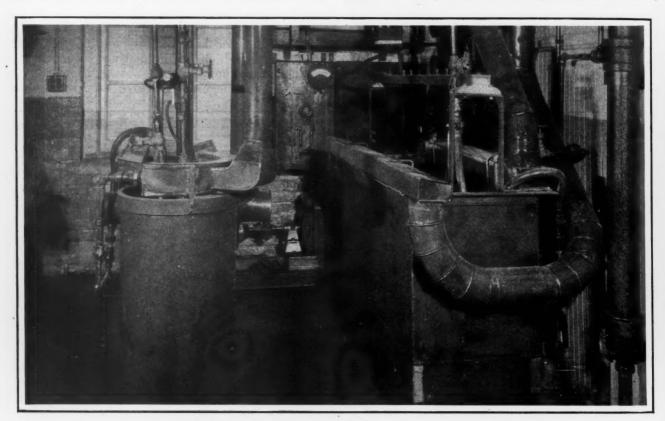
Smaller Equipment Used in Chromium-plating Tools and Gages
